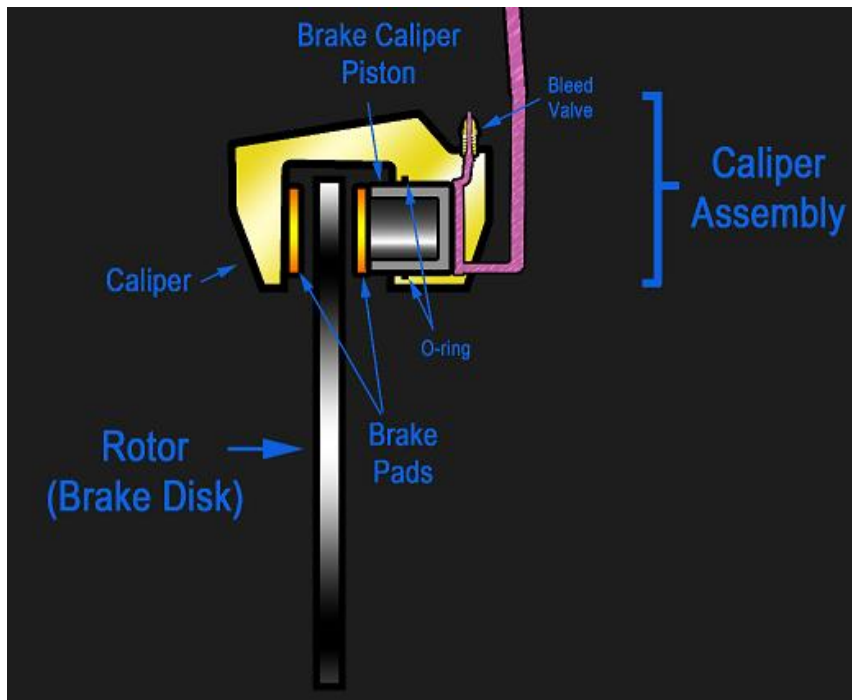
Brake Caliper assembly (Hydraulic Brake Diagram)
